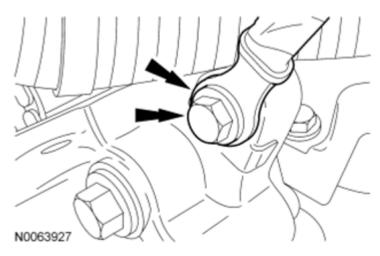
Locating Ground Wire Bolt Courtesy of FORD MOTOR CO.
